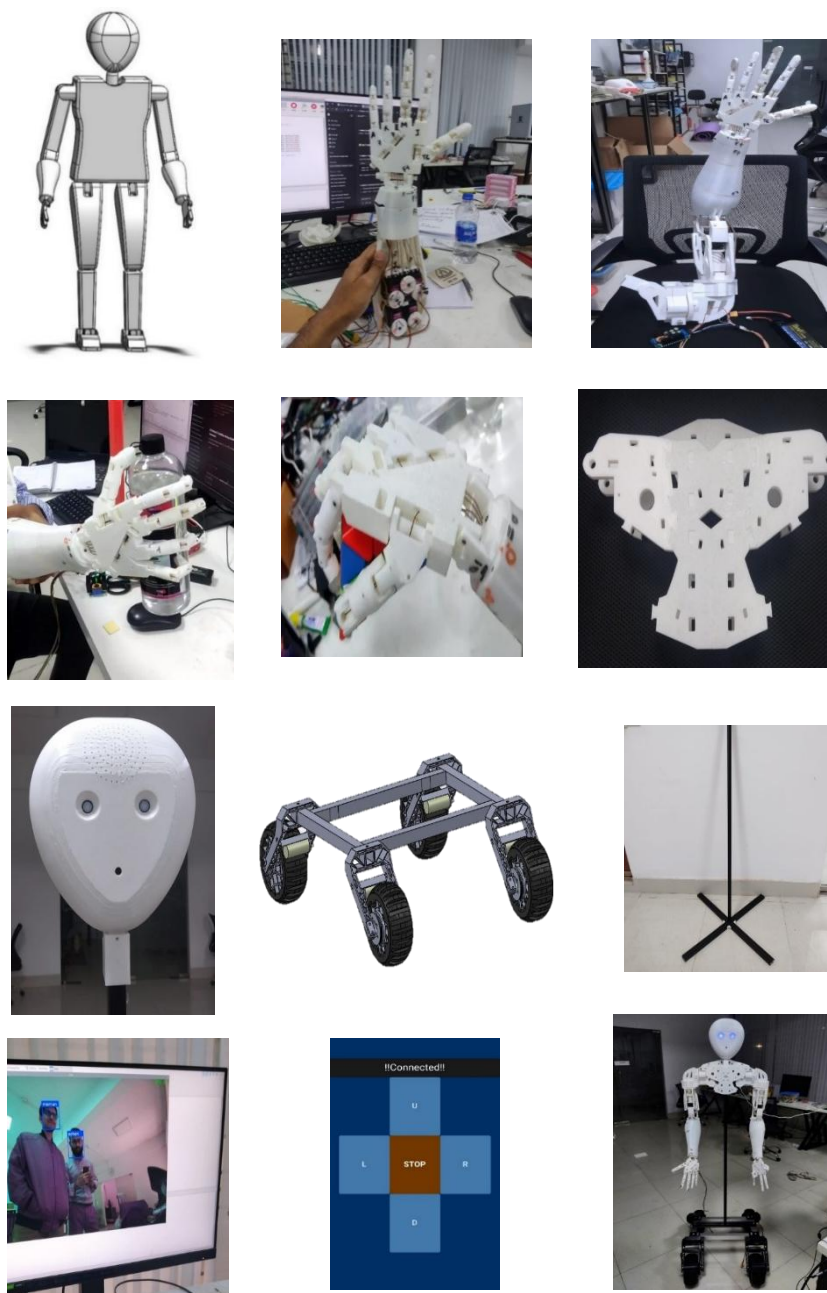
Design, Assembling, integration, and testing of a humanoid robot
